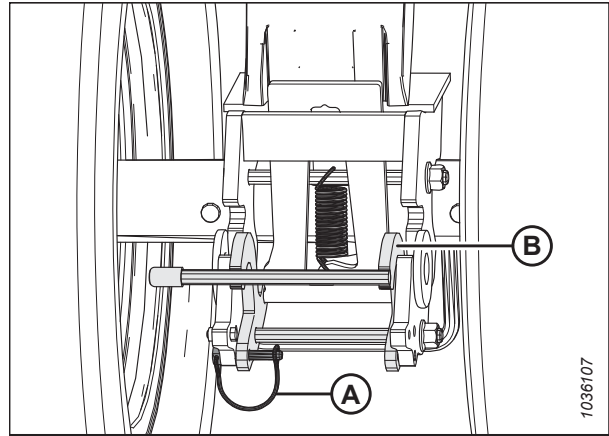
Left Transport Wheels – Rotation Lock Latch Engaged
